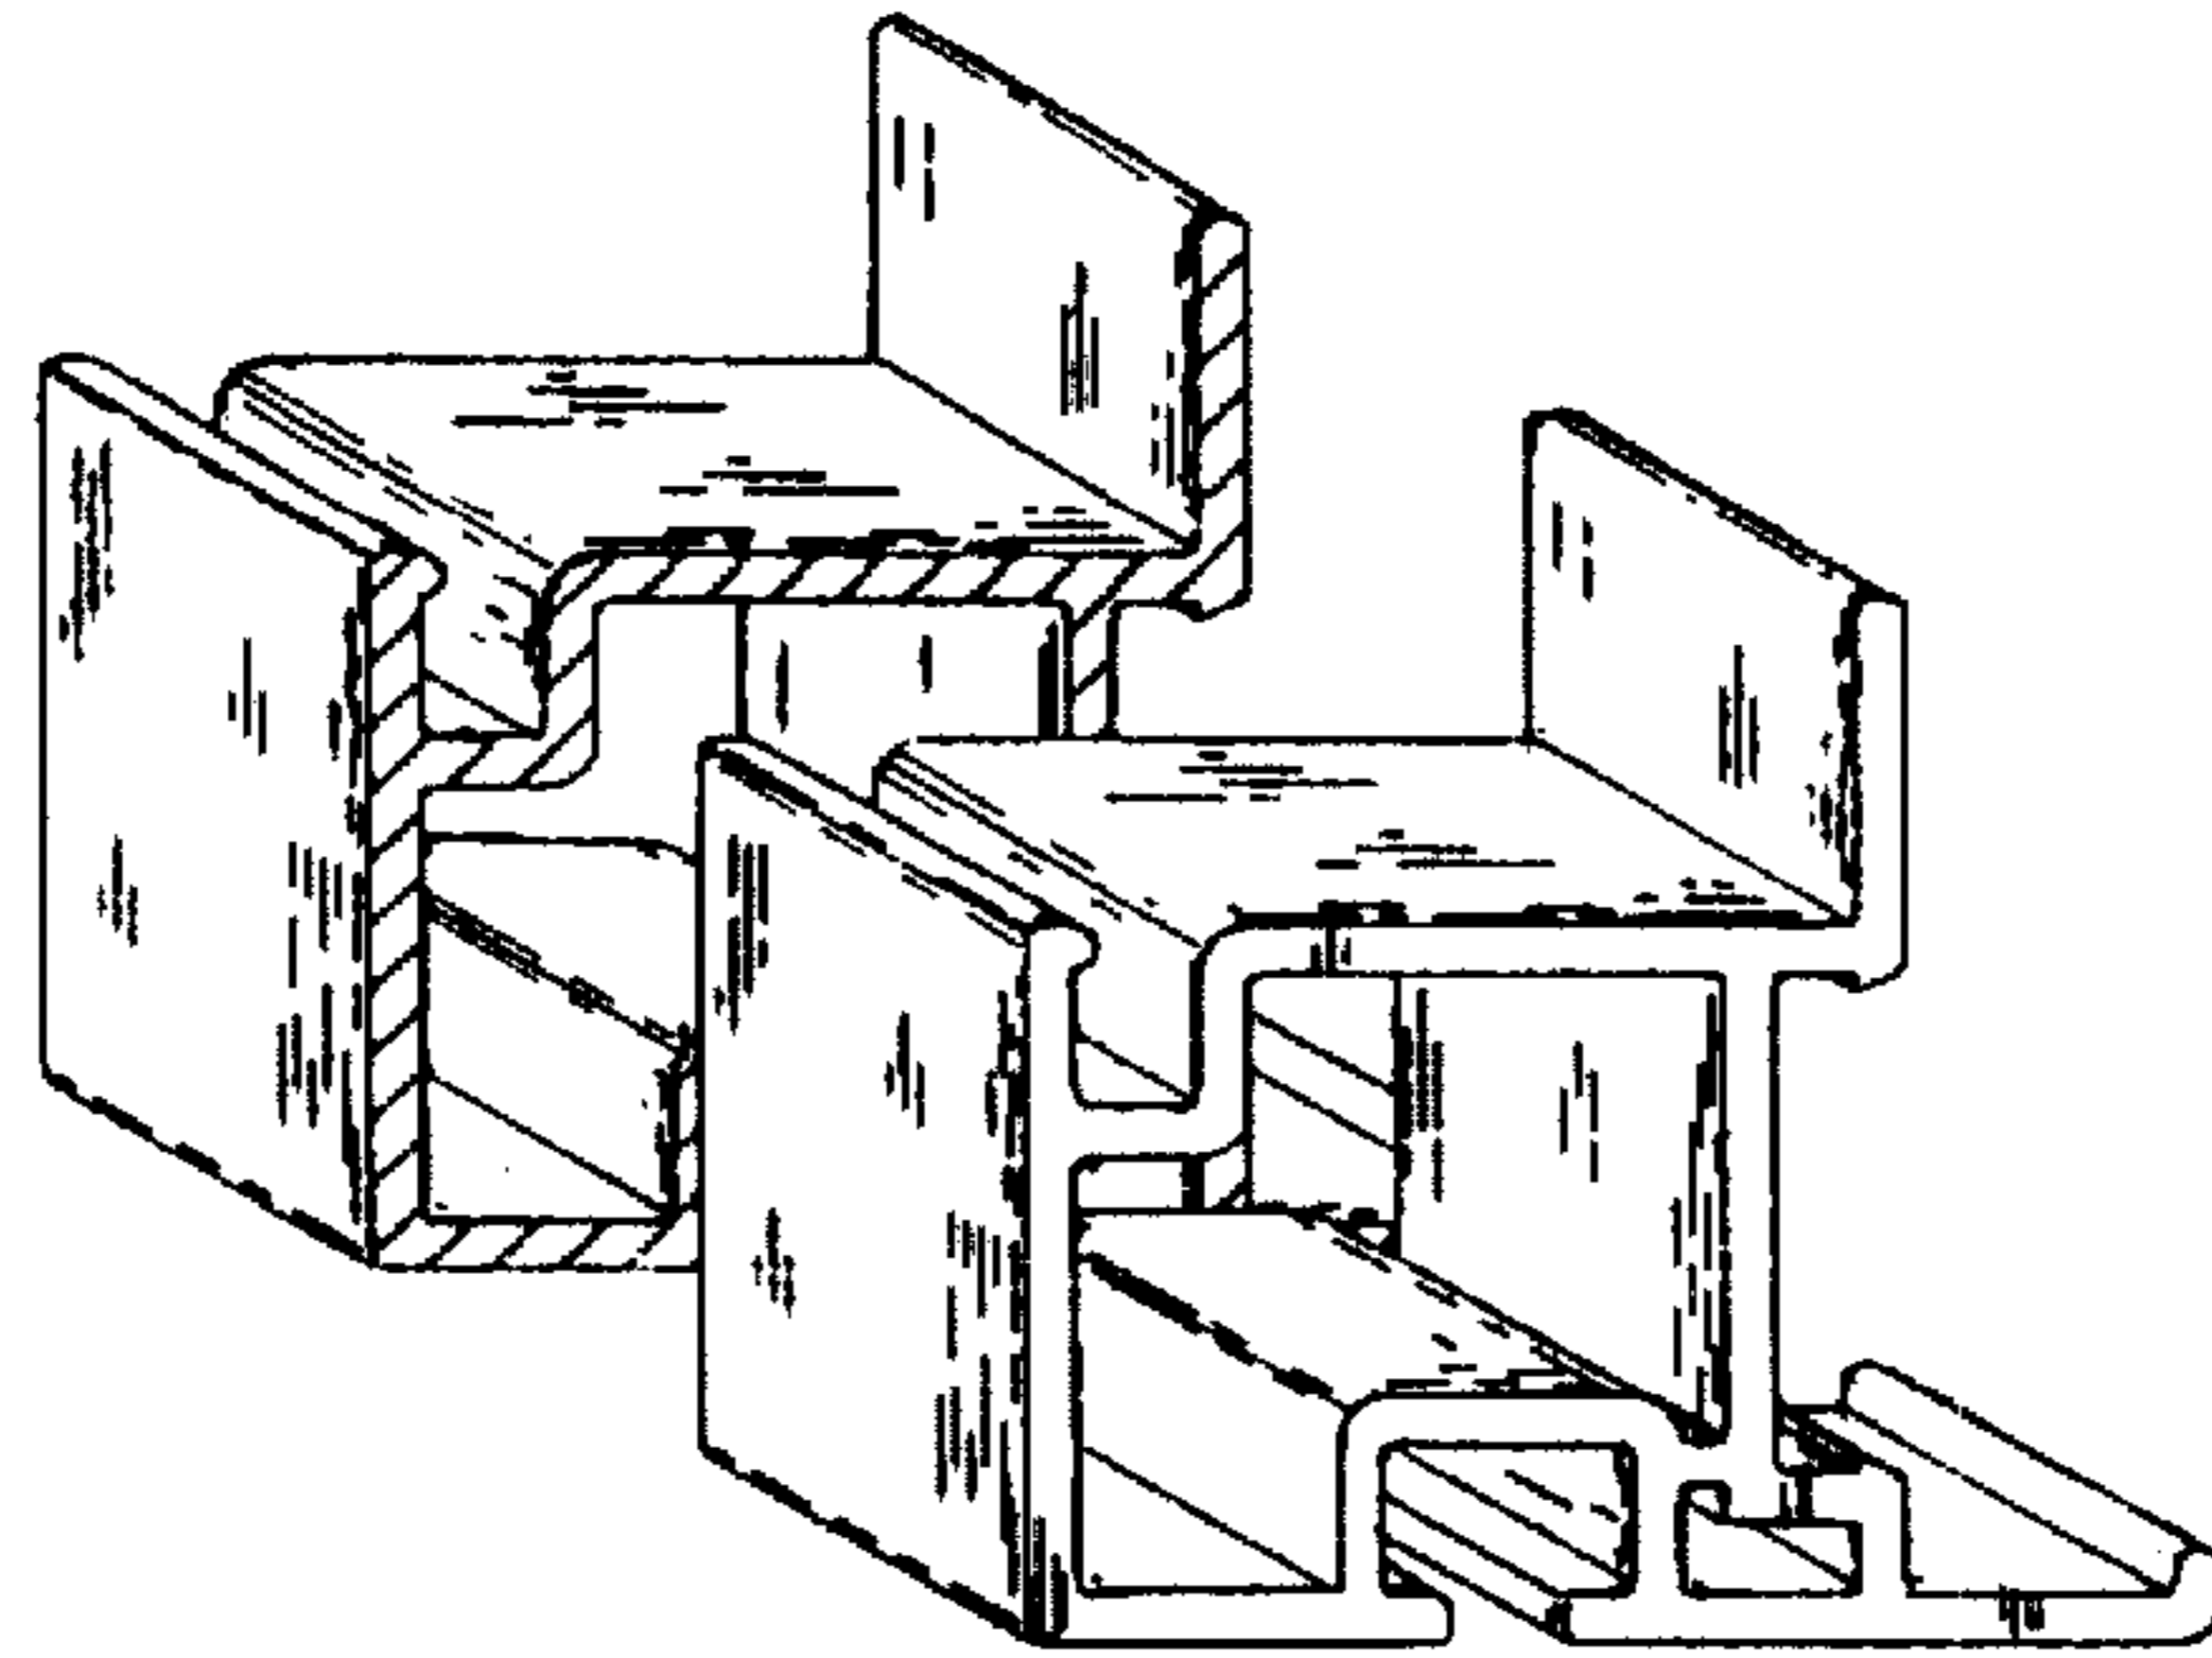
is a bottom left perspective view of the window component extrusion shown in FIG. 1.
